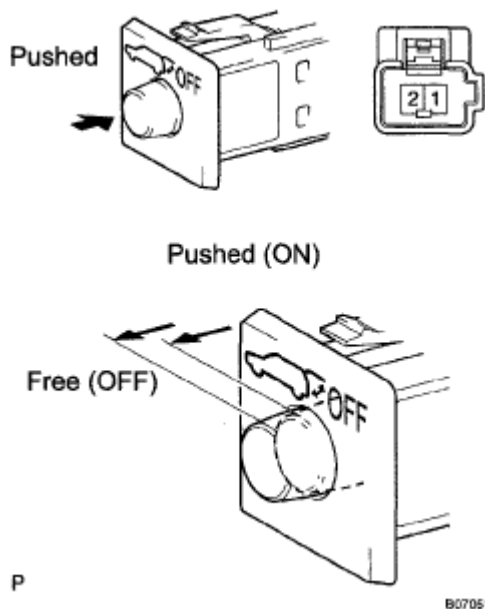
Inspecting Power Back Door Main Switch Assembly
